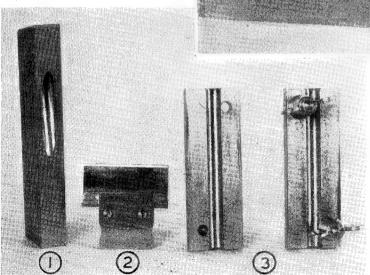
The belt-jointing equipment, 1—the planing block; 2—the plane; 3-the upper and lower plates of the belt clamp
